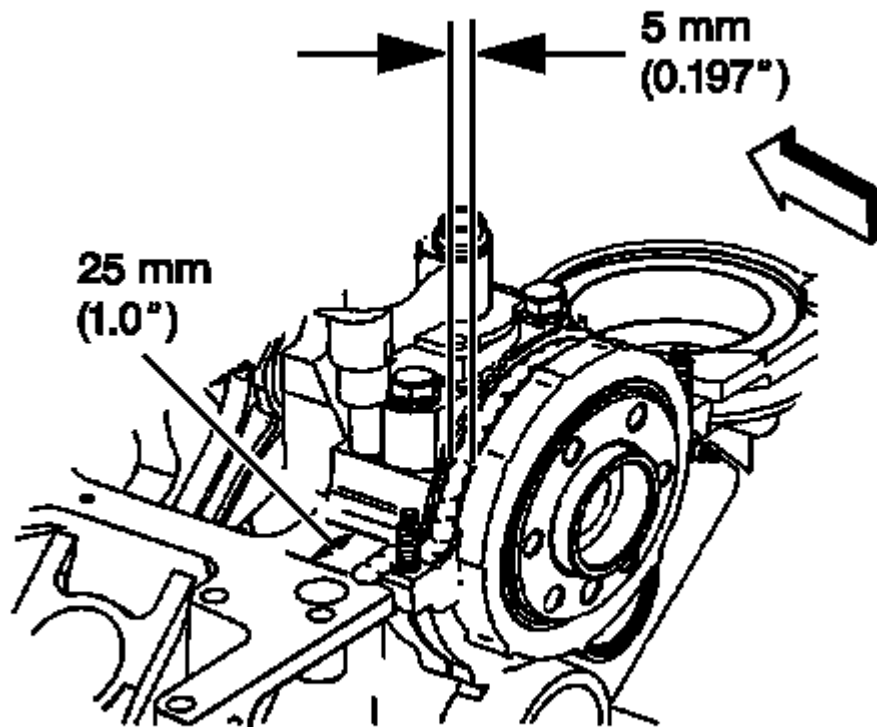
Applying Adhesive To Entire Length Of Rear Oil Seal Housing To Engine Block Junction At Oil Pan Sealing Surfaces
